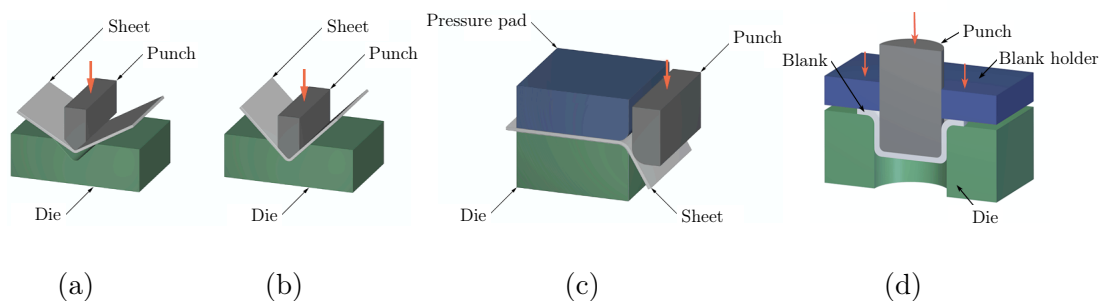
Schemes of metal sheet forming processes. (a): V-bending under air-bending condition; (b): V-bending under die-bending condition; (c): wipe bending; (d): drawing.
